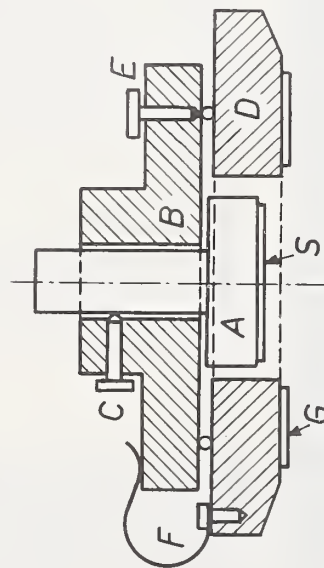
Schematic view of the angle-polishing jig. The slice S is waxed to the piston A , which fits tightly into holder B and can be clamped with screw C . With the screws E the slice can be tilted with respect to the support D , which rests on pieces of silicon G .
